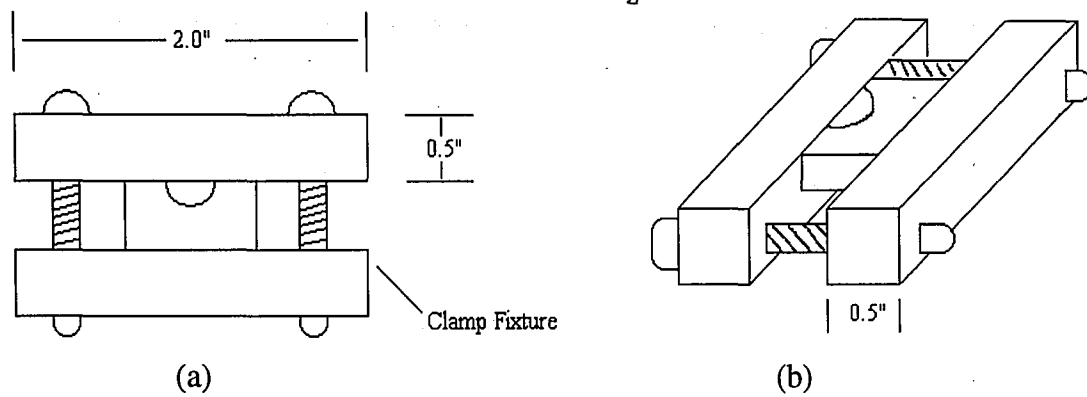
Schematic diagram of the clamp fixture used for serial sectioning.
